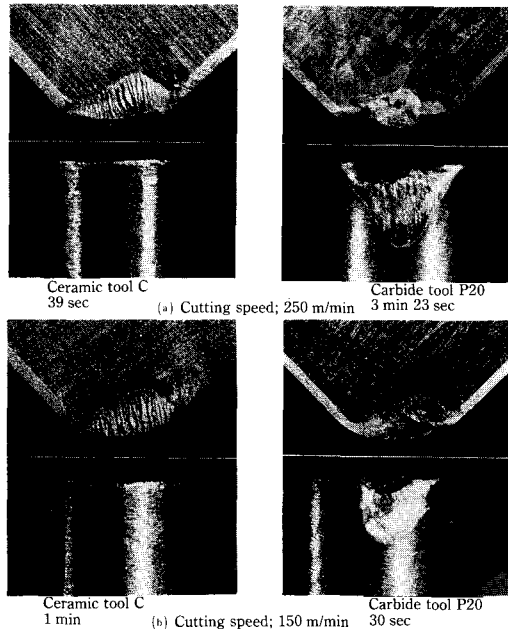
Wear patterns of tested tools in face milling of hardened JIS S55C steel
